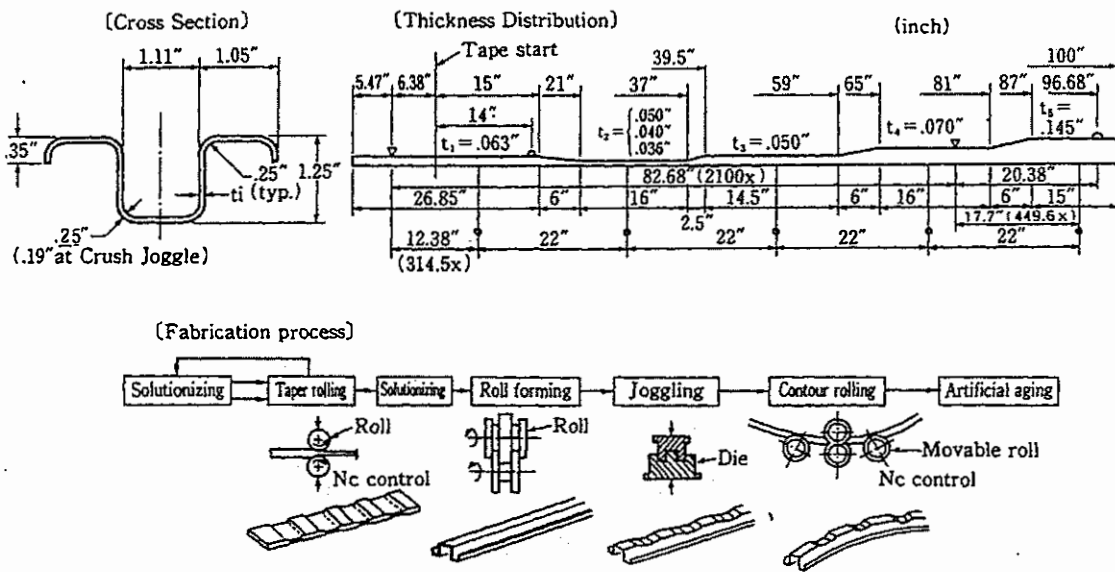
Manufacturing process of a taper-rolled stringer for airplanes^{99,104)}.
